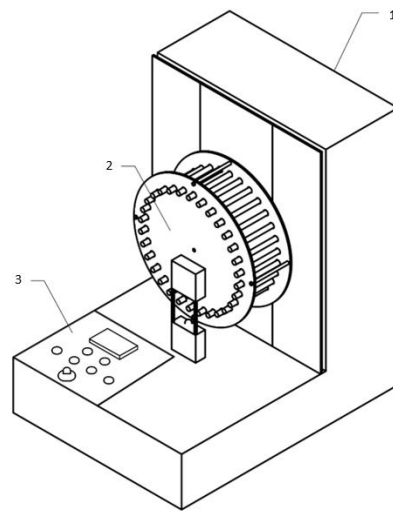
3D Isometric View of Mechanical Cigarette Rotator
